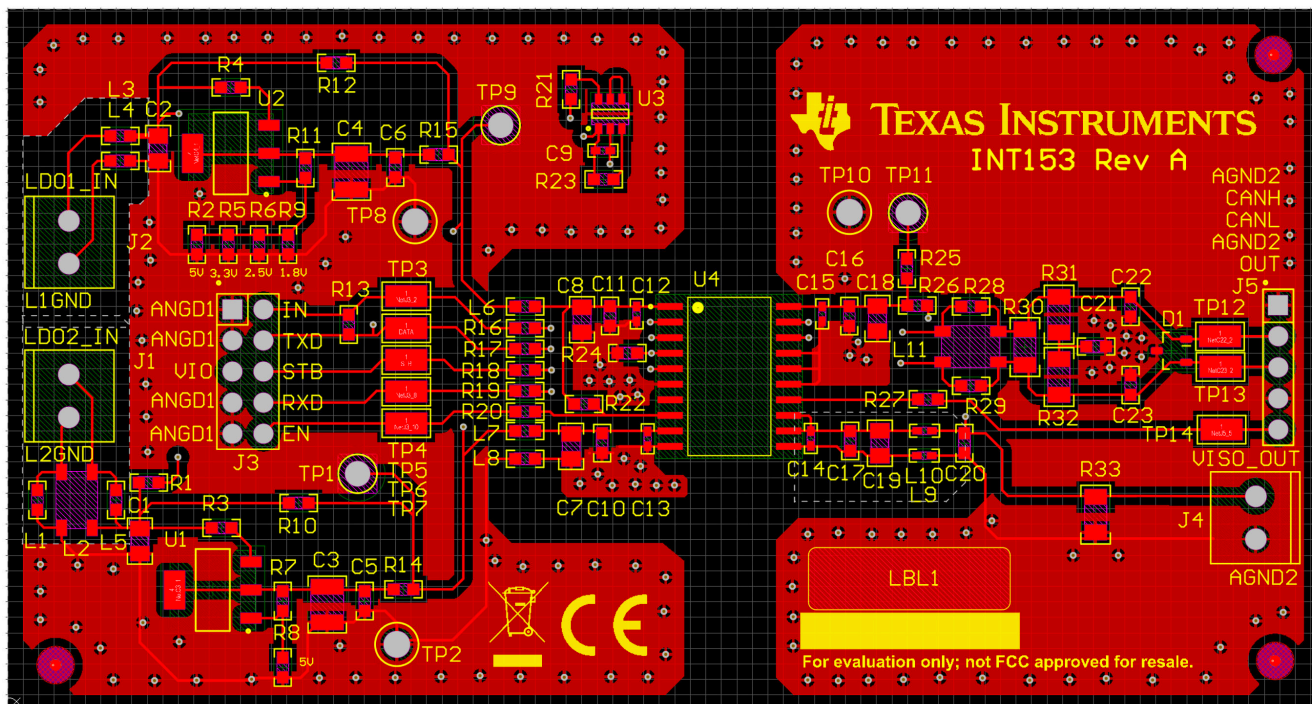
ISOW1044DFMEVM PCB Layout - Top Layer
